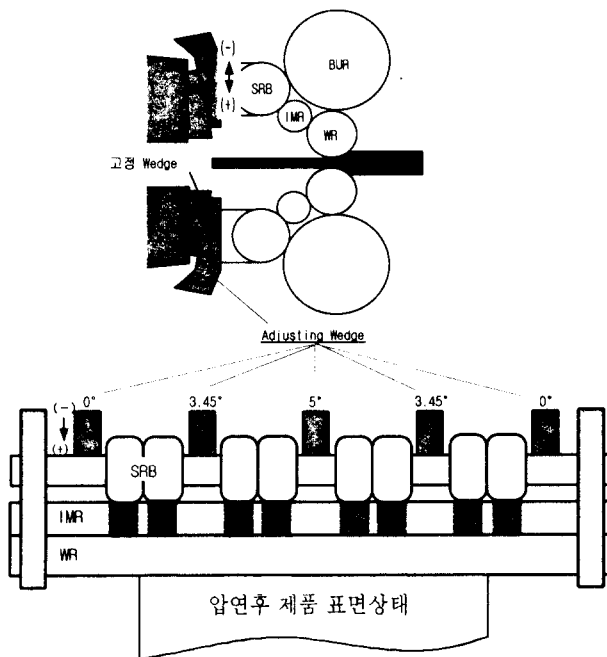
Printed Shape of the Product Surface by Support Roller Bearing
